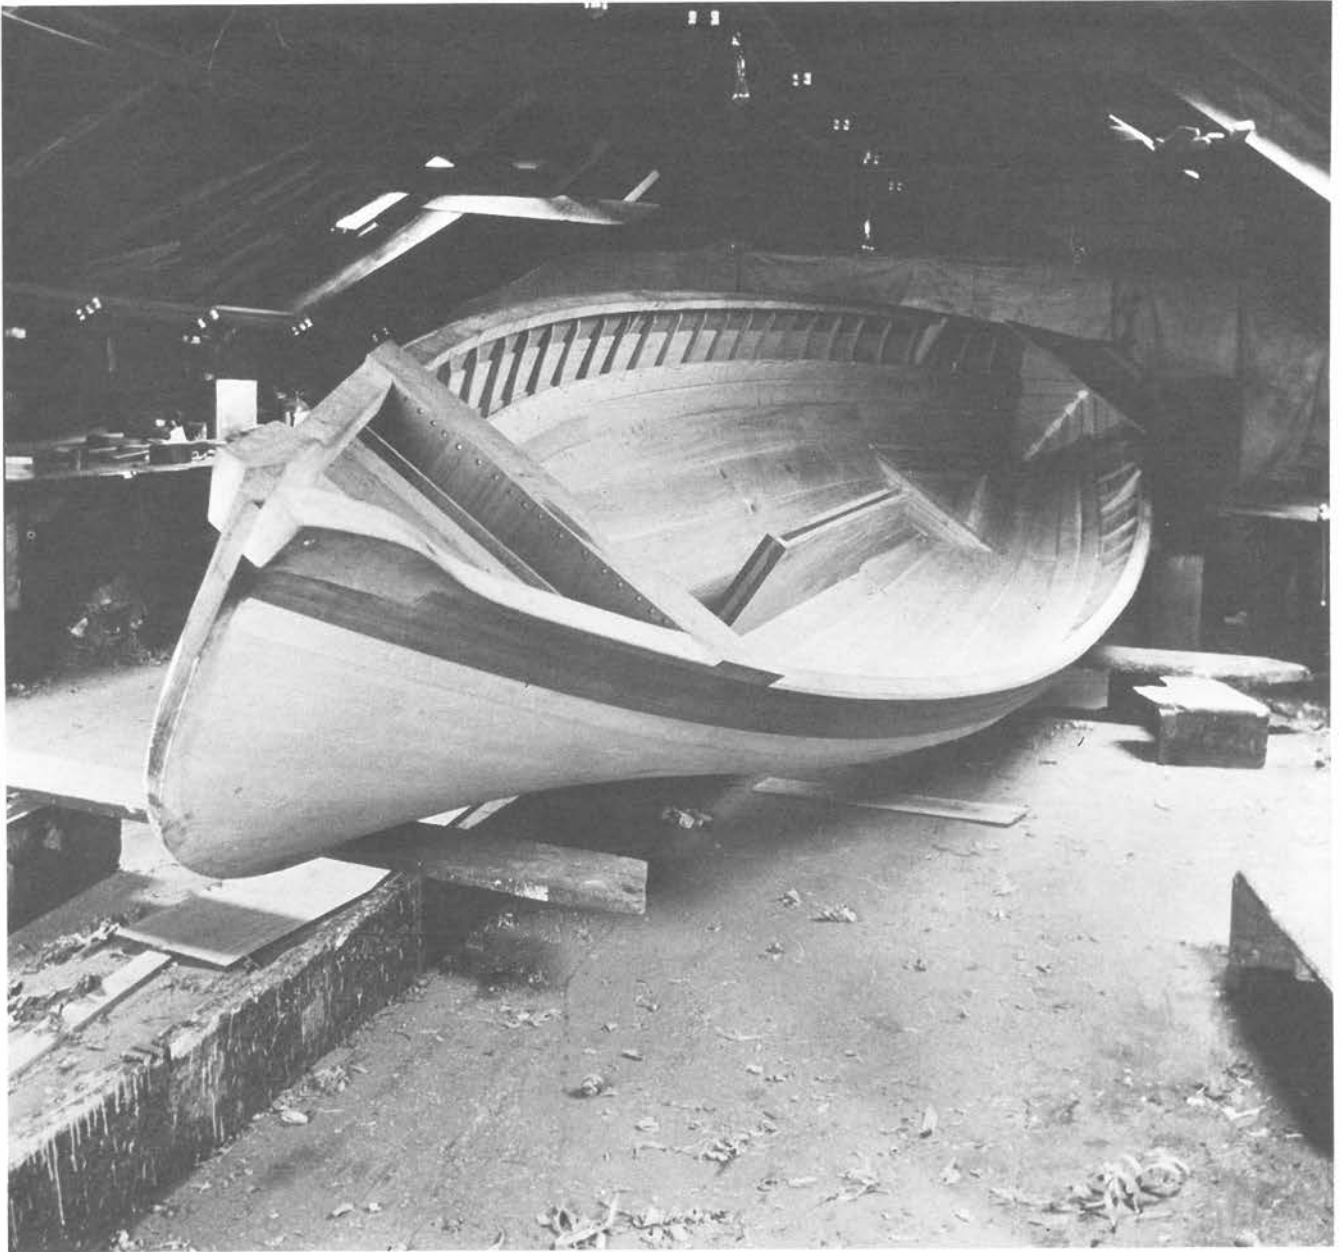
The Beetle shop with the boat from Figures 4-4 and 4-6 framed and ceiled. Note the widths and shapes of the ceiling planks. The thwarts will probably be fitted before turning the boat over to spike the centerboard case (from the keel up). Note the construction of the bow chocks and the absence of cheek pieces, a hallmark of Beetle whaleboats. From a negative by Albert Cook Church.
